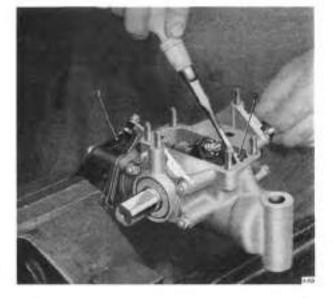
Removing the bleed jers TO MOUNTING PLATE HELD IN VICE 2. BLEED JET
